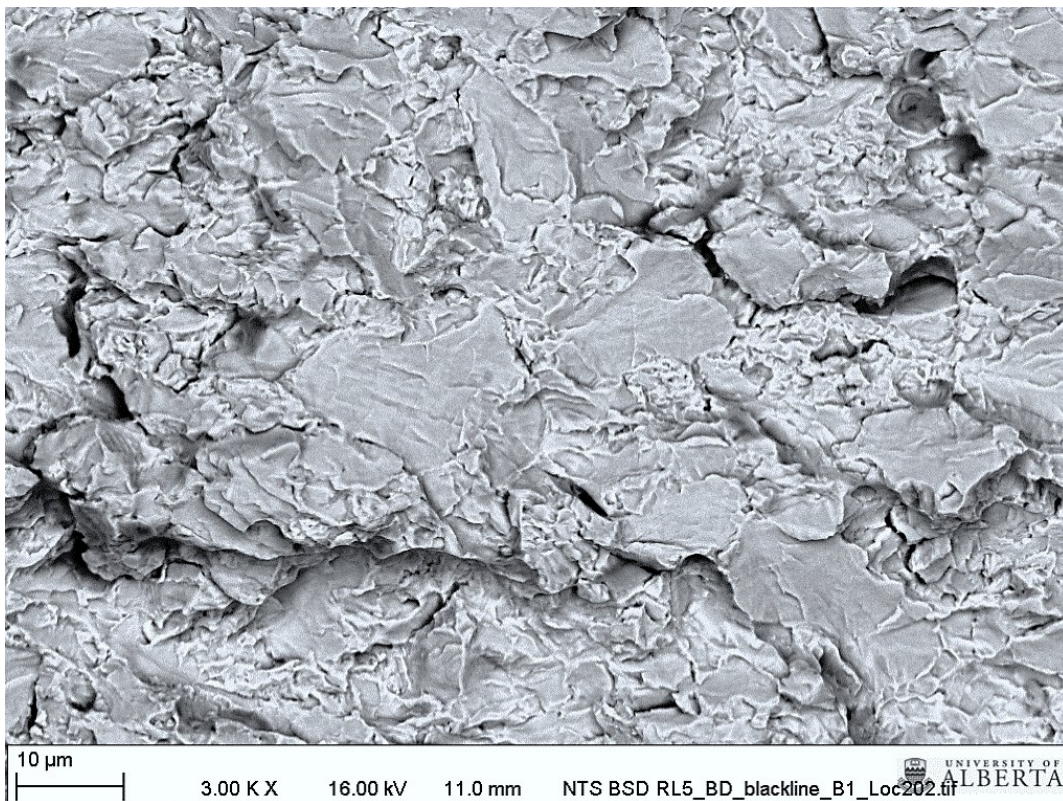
Fracture surface morphology in the corrosion fatigue region, showing quasi-cleavage fracture mode
